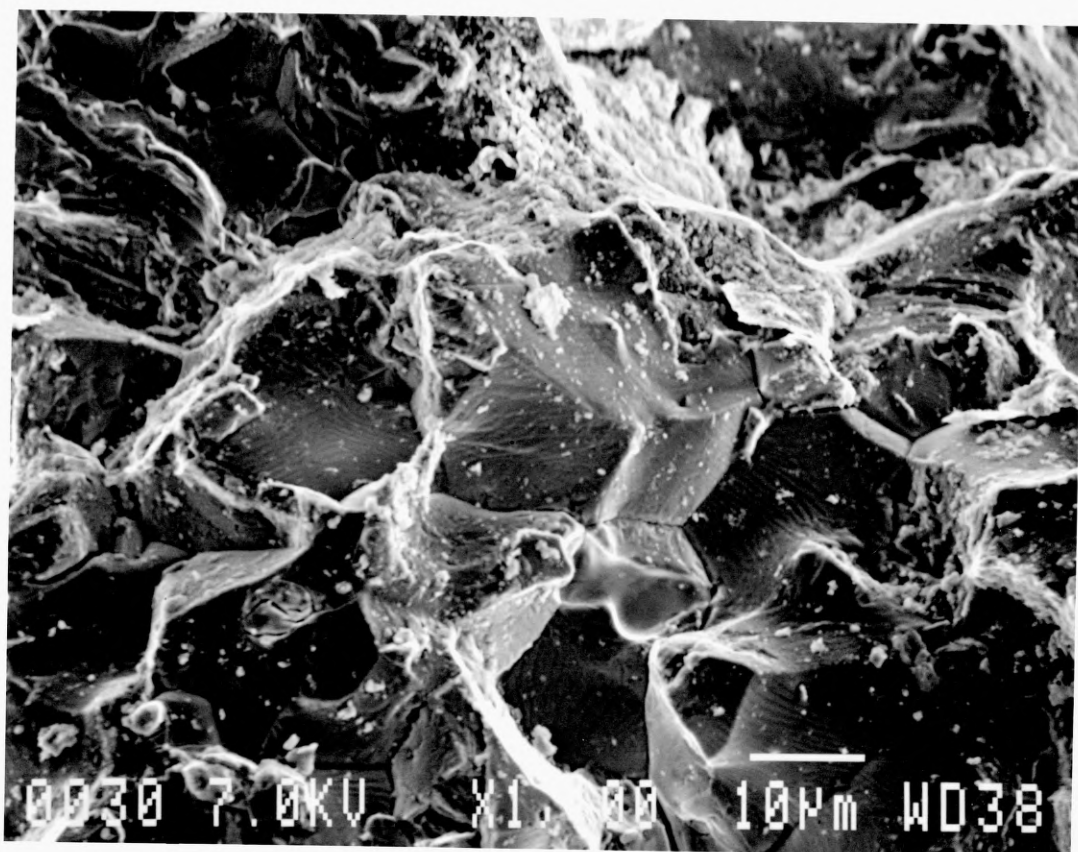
Striations observed on corrosion fatigue fracture surface of the white zone, clearly visible at low kV.
